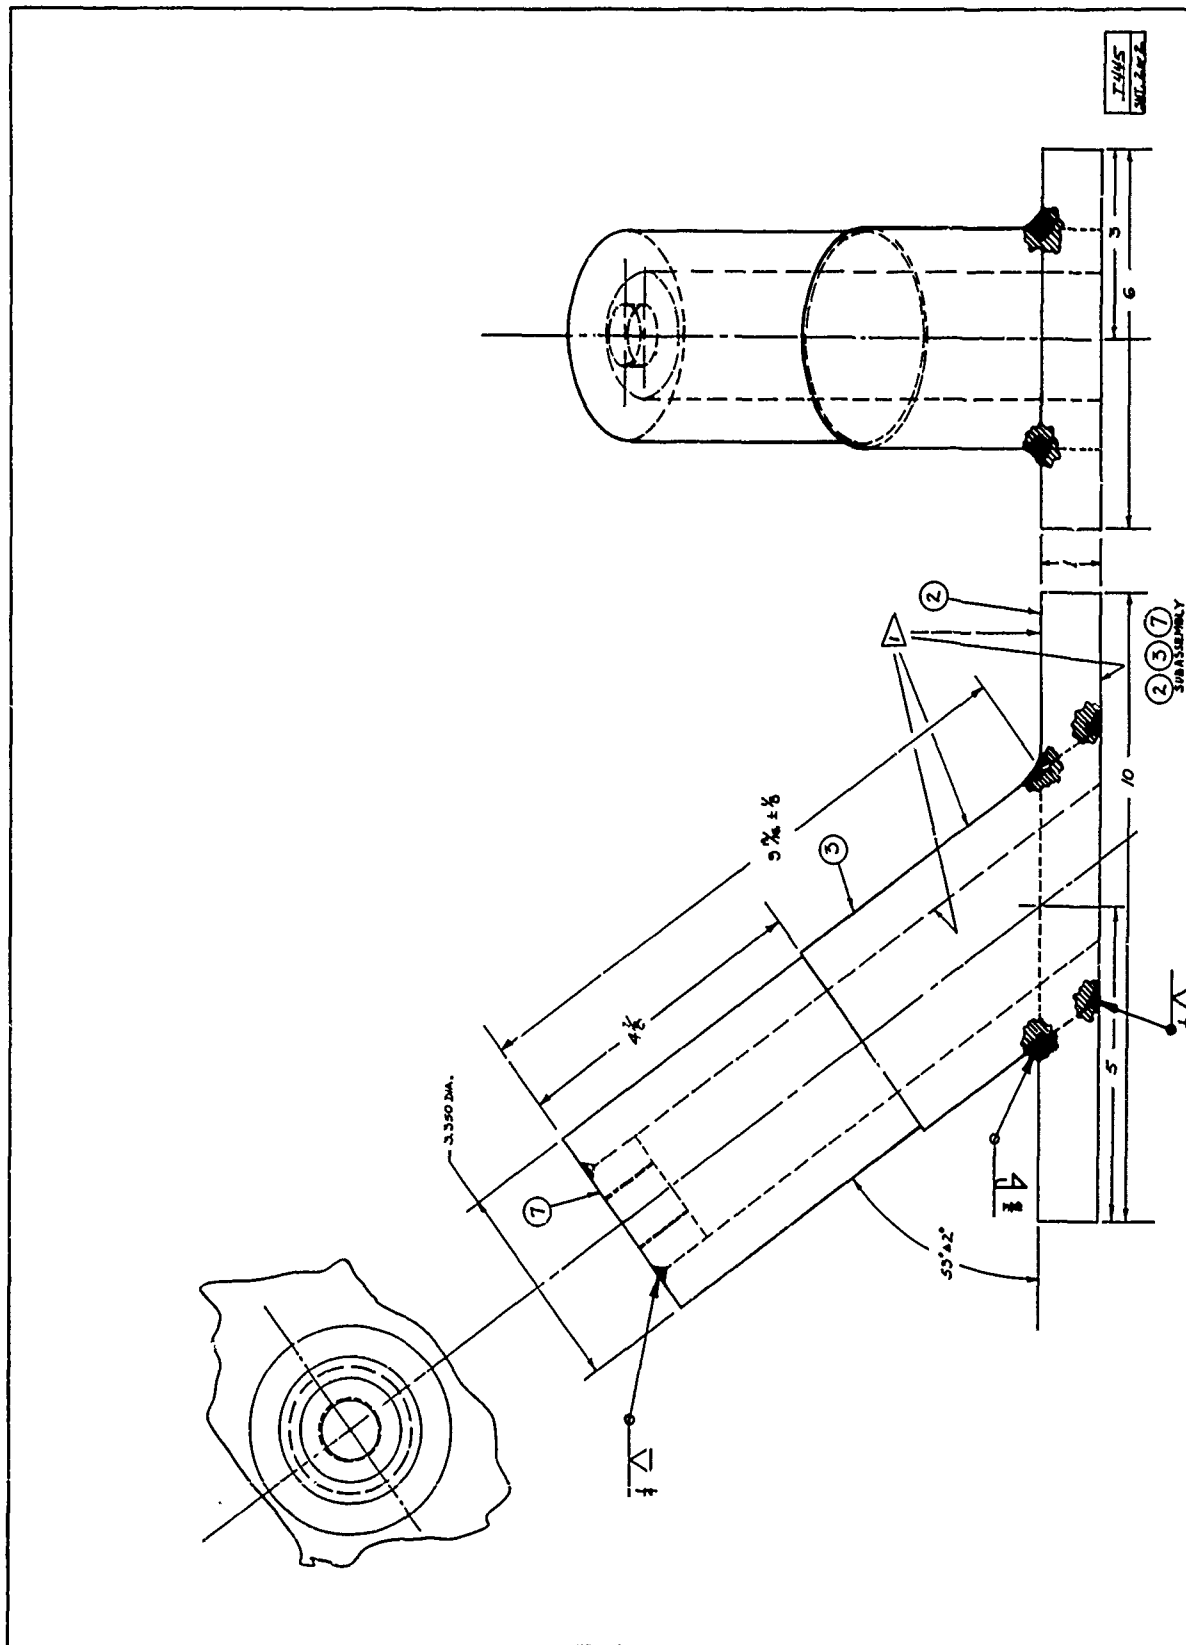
Side Brace Attachment Test Fixture, Sheet 2 of 2
